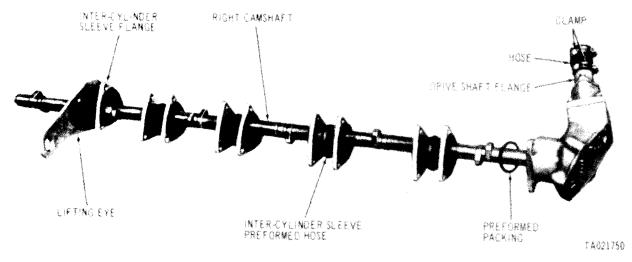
Removing or installing lifting eye, intercylinder base flange, and hoses, model AVDS-1790-2C and AVDS-1790-2 D engine. NOTE drive gear away from the camshaft driven
